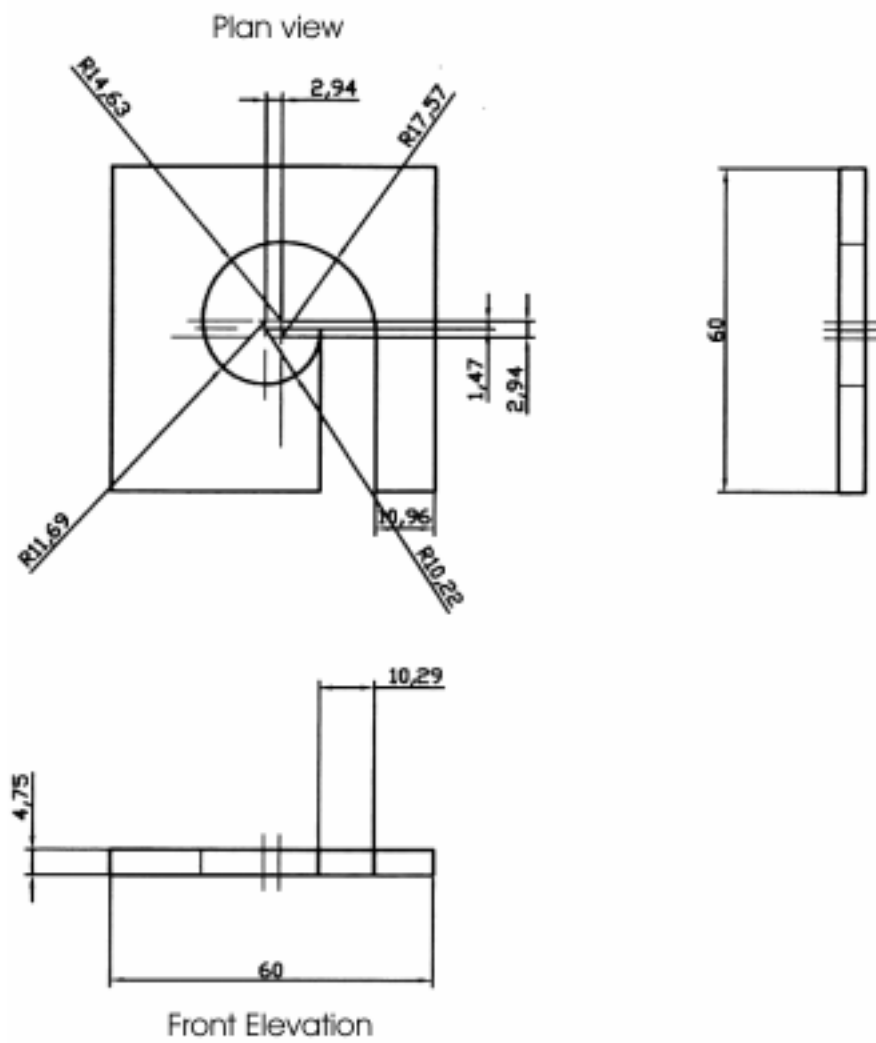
Plan view and front side elevation of Perspex slice forming inlet involute
